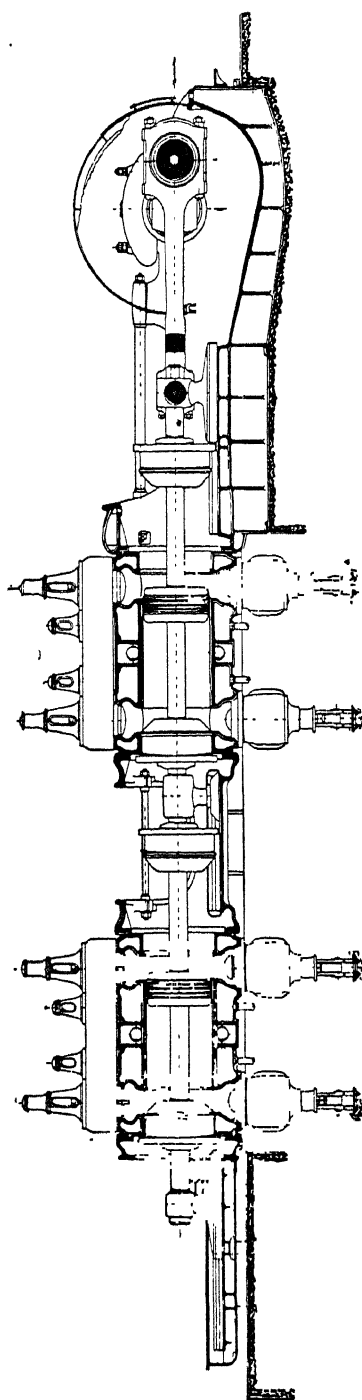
CLEANING THE FORWARD VALVES OF THE NÜRNBERG GAS-ENGINE.
